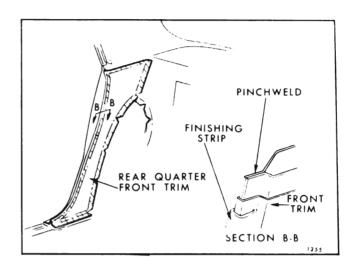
Rear Quarter Trim Assembly assembly). (Fig. 14-35).
